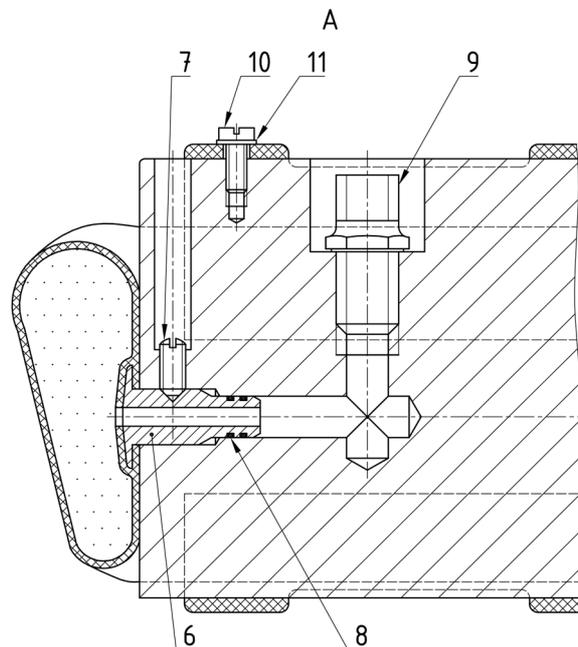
Pneumatic flexible shaft coupling with hose flexible element detail of the pneumatic plug connection [4 - 5]
